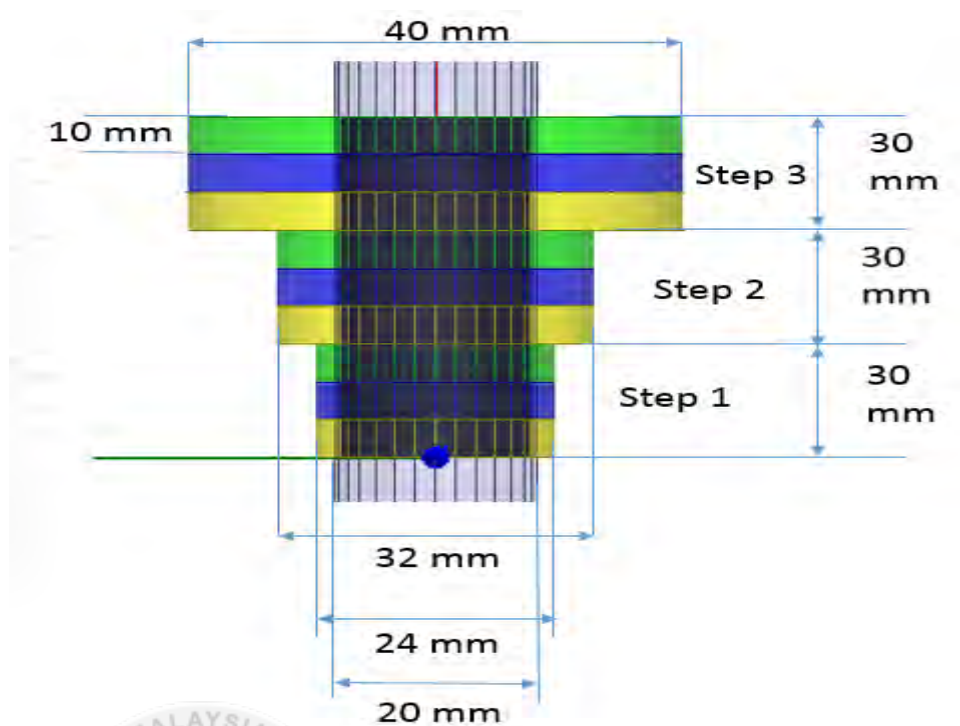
Dimensions of step windings of the reluctance actuator represented in side view
